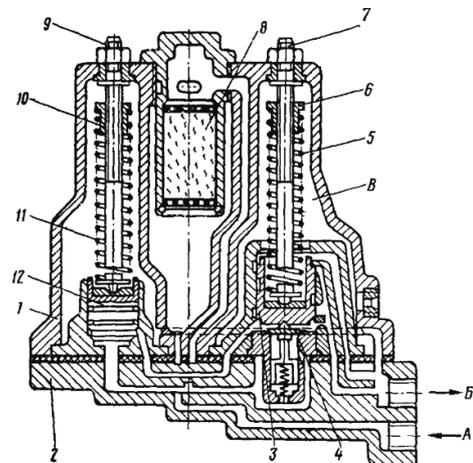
Pressure regulator 3РД: 1 – case; 2 – cover; 3 – valve that includes; 4 – check valve; 5 – valve spring, including; 6,10 – nut; 7 – valve spring screw 3; 8 – filter; 9 – shut-off valve spring screw; 11 – shut-off valve spring; 12 – shut-off valve; A – air from main tanks; Б – to compressor unloading devices; B – valve cavity
